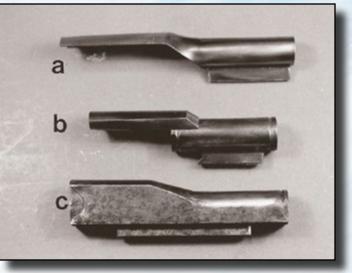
Any of these entry thimbles will work on a Hawken: (a) the traditional return sheet metal cap used on longrifles, (b) my homemade turned & machined two-piece version and (c) the sturdy cast version that requires much more mortising.
